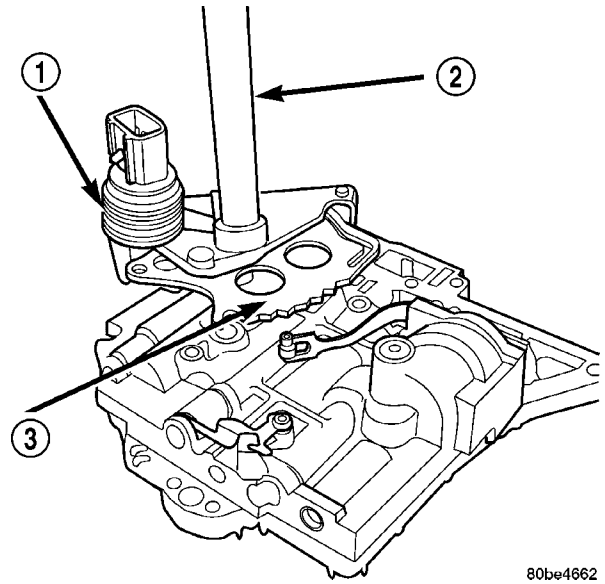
Manual Shaft/Rooster Comb and Transmission Range Sensor
